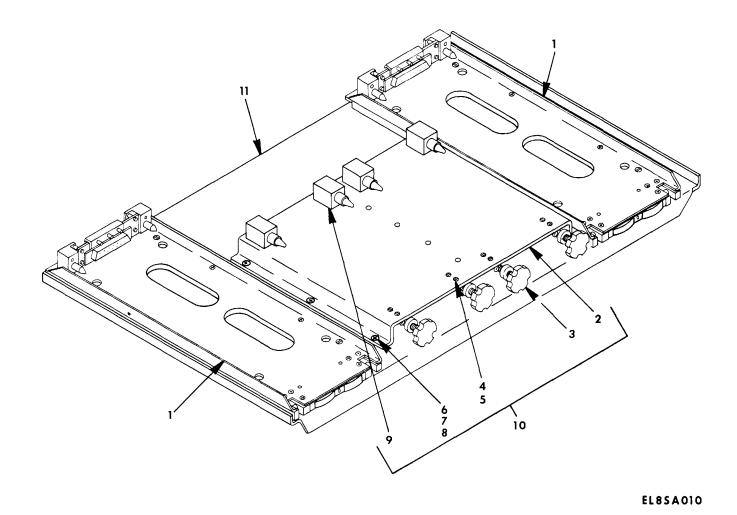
BASE PLATE ASSEMBLY (LOWER), AND MOUNTING PLATE ASSEMBLY (LOWER)
